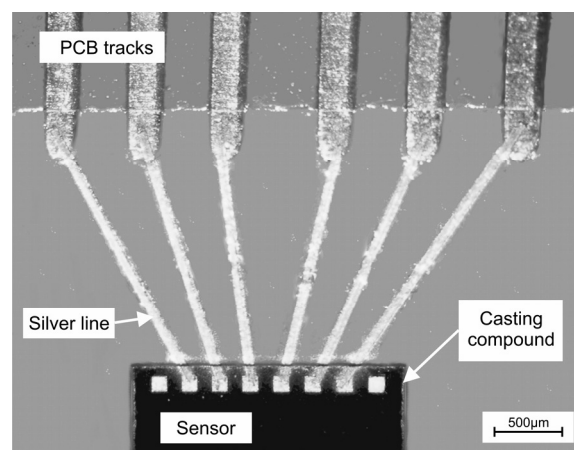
Thermal flow sensor electrically connected with INKtelligent printing® to a printed circuit board.
